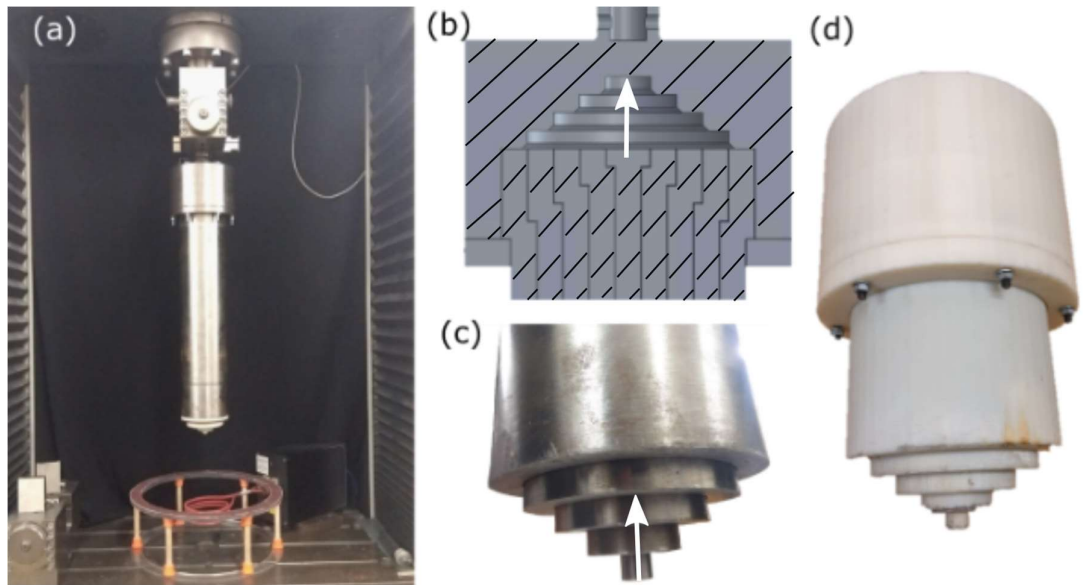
(a) Reconfigurable multi-step tool fitted inside a universal test machine. End of tooling fitted with 3D printed ABS ripple tooling, (b) internal geometry of the upper housing of the multistep tooling in free hanging position and (c) close-up showing the end of the steel tool, (d) plastic prototype of multistep tooling. When the central cylinder in (c) comes into contact with female tooling the cylinder will rise into hollow cavity as marked by arrow in (b)
